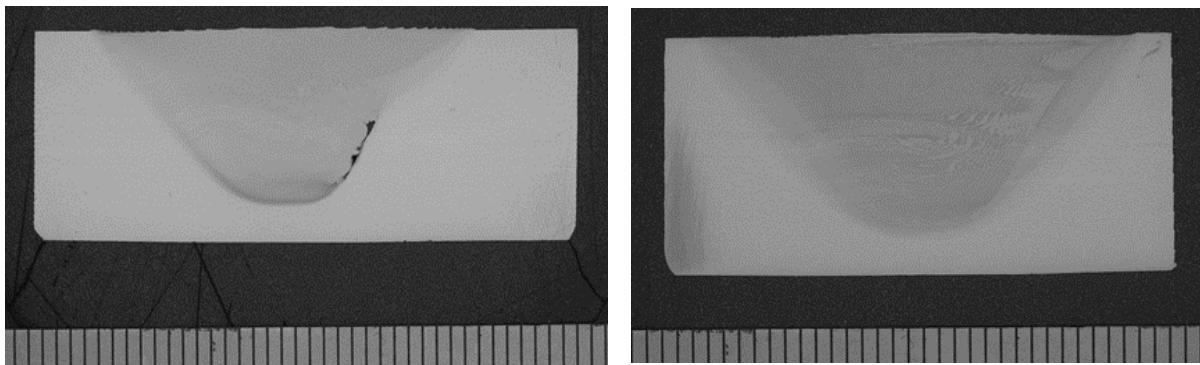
Examples of (left) a partial penetration friction stir weld pass in steel exhibiting a cold lap defect and, right, a similar partial penetration weld made with parameters adjusted to prevent the occurrence of such a defect.
